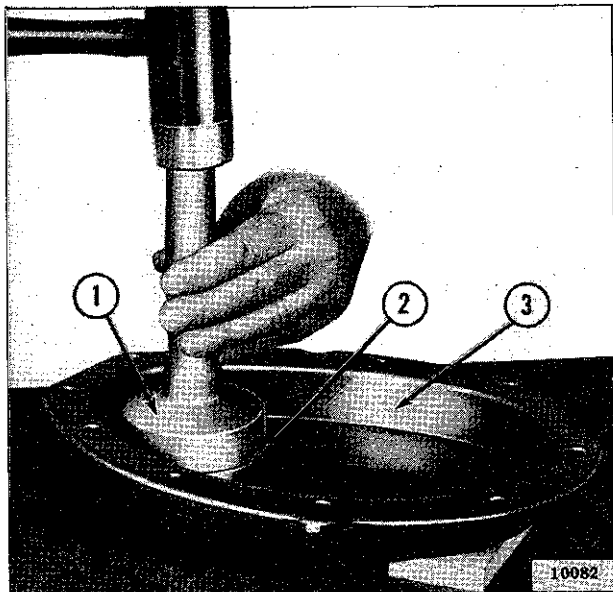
INSTALLING TIMING CHAIN COVER OIL SEAL
